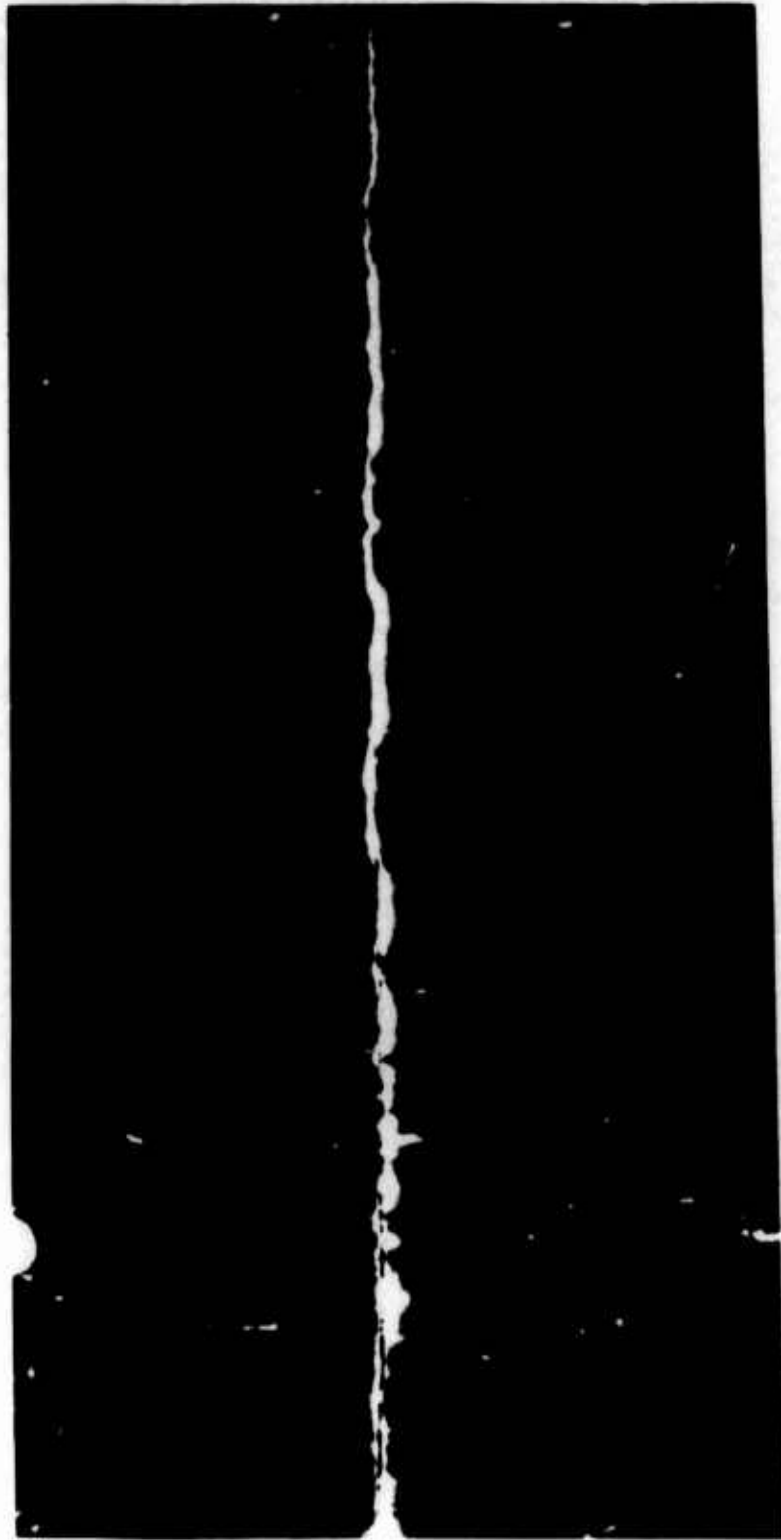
Photograph of the shear zone with a visible separation of the crack surfaces.
